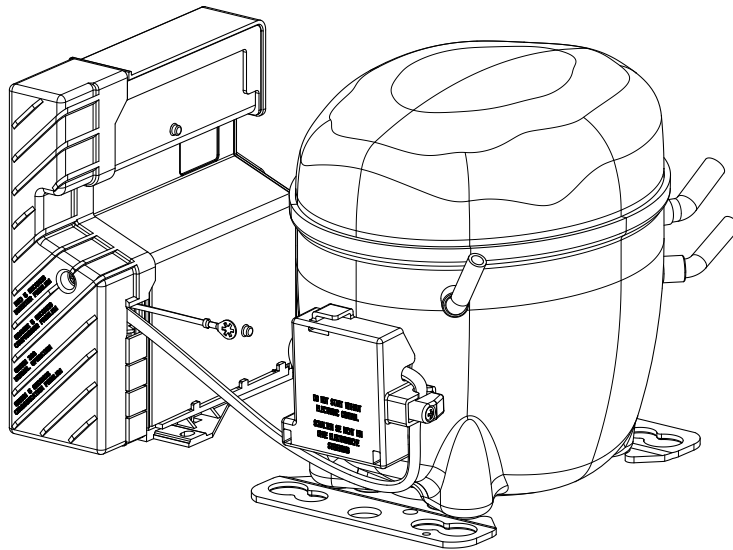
Perspective view of Inverter and Compressor assembled system.
